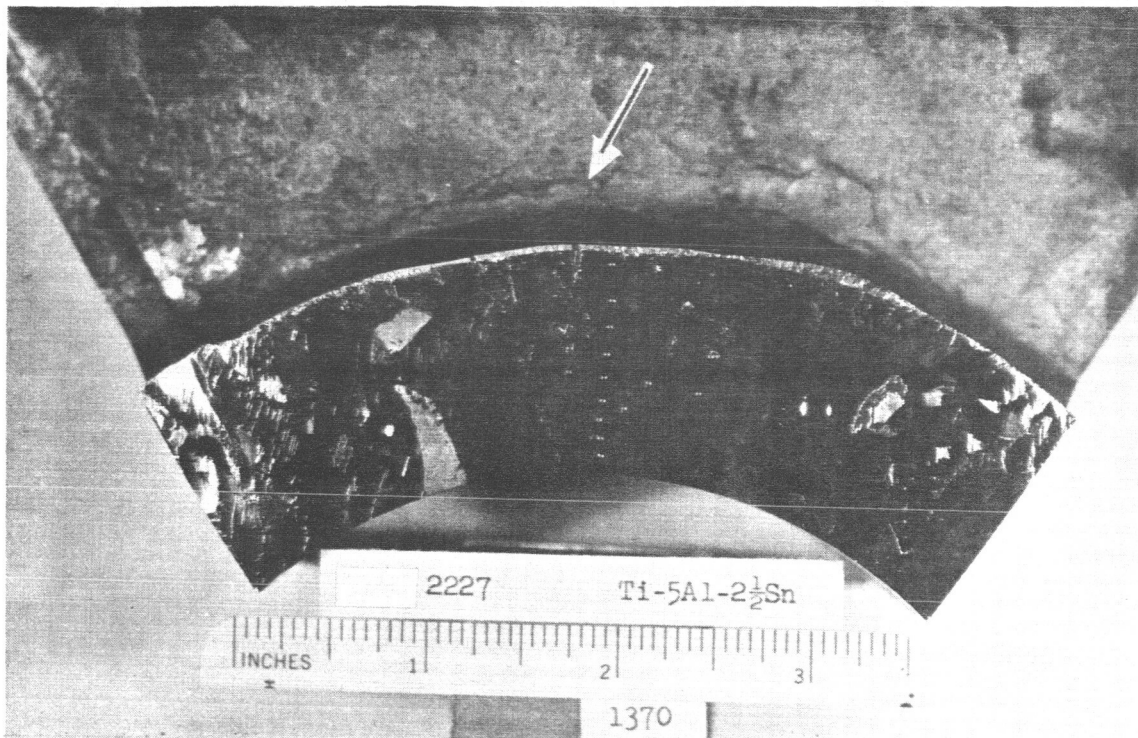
Cracked Weld in Macro-Etched Condition.
